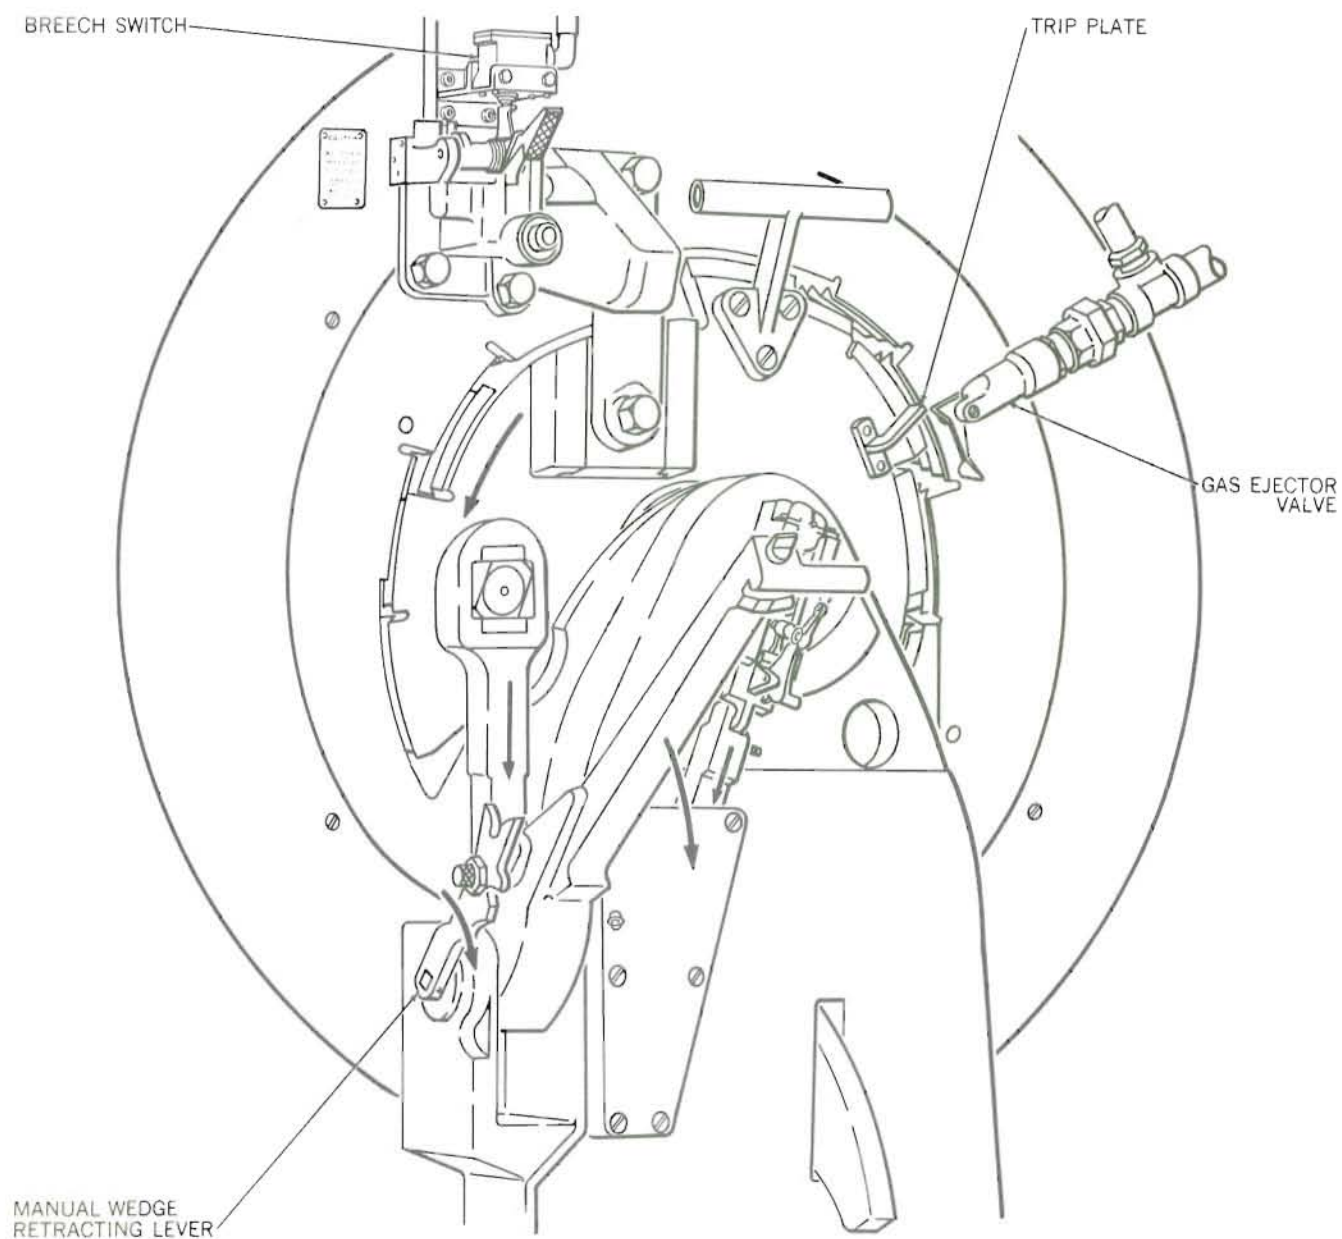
G. 16-inch Gun Assemblies. Breech Opening. Plug Rotation.
